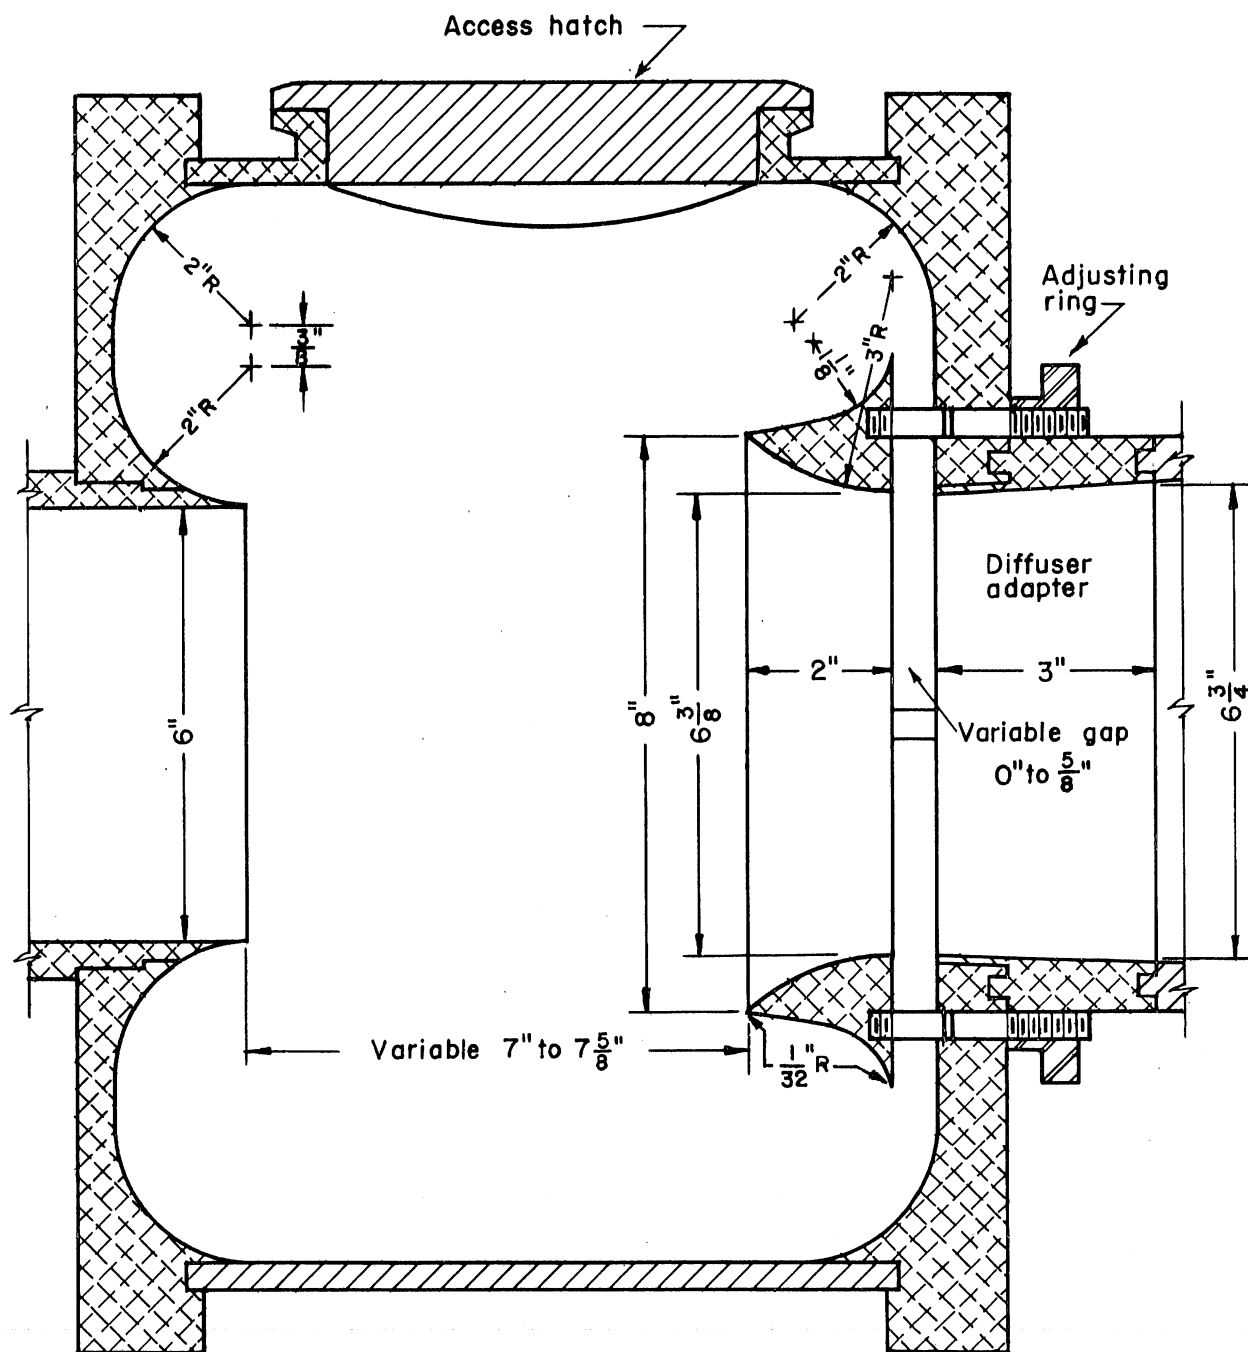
Model Open-Jet Test Section with 6 $\frac{3}{8}$ -in. Pick-Up Cone
